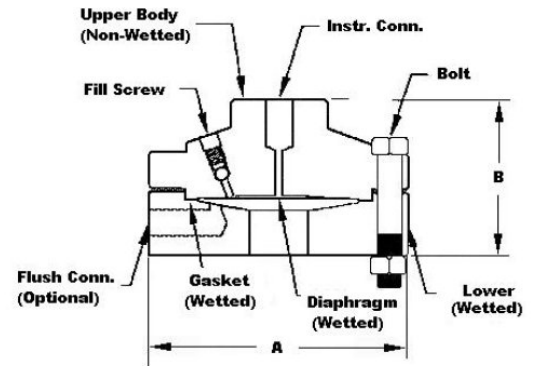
Seal Dimensions (Threaded Process Connection Seals)
